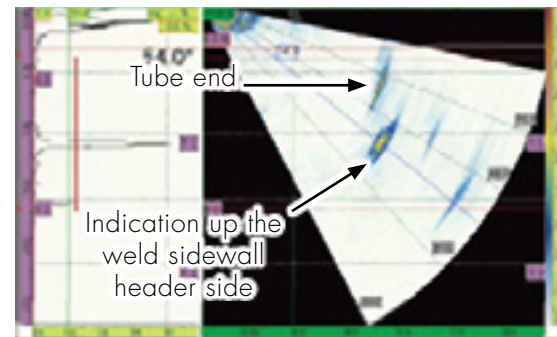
Phased Array Sectorial image of a screen shot of a Stub Tube weld
